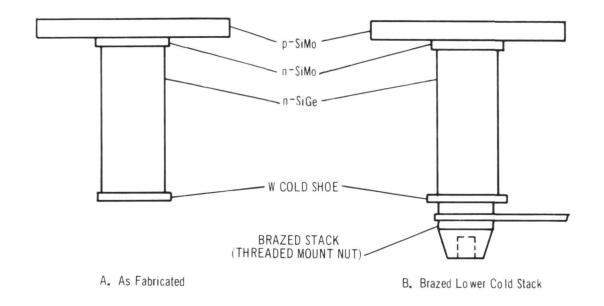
Hybrid Thermocouple Assembly – Design BX – 4
